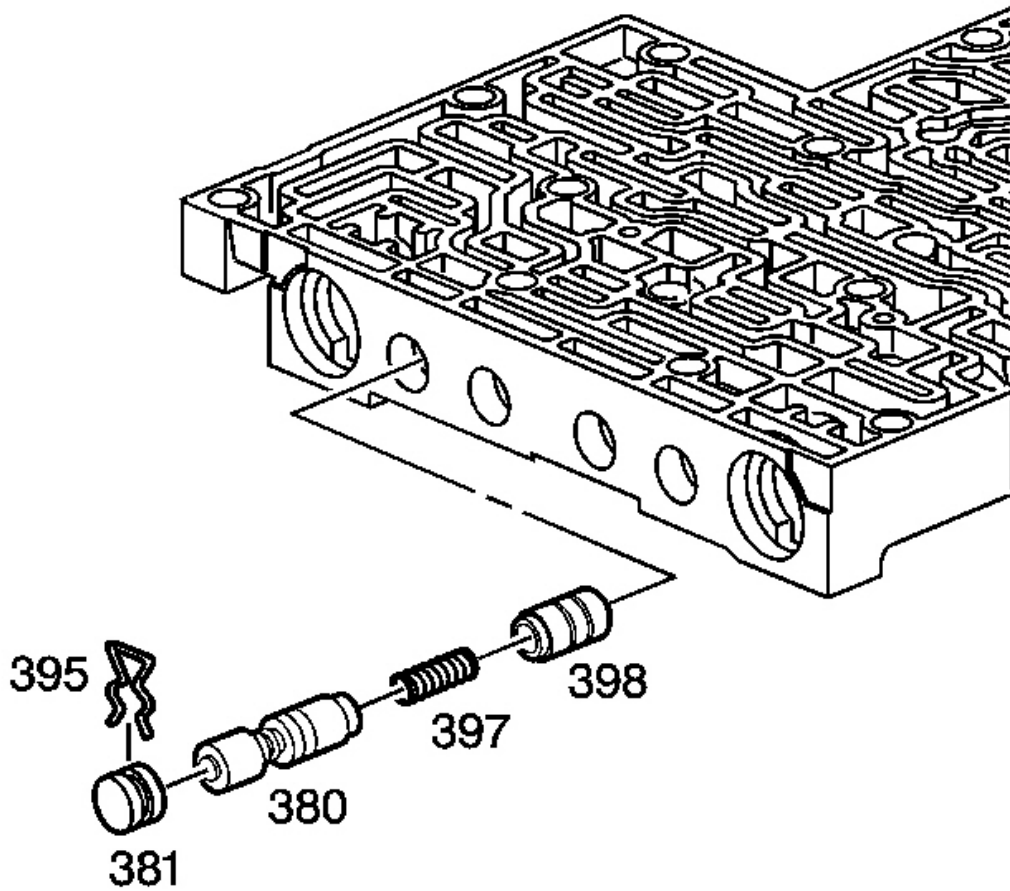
Identifying Isolator Valve & Regulator Apply Valve
